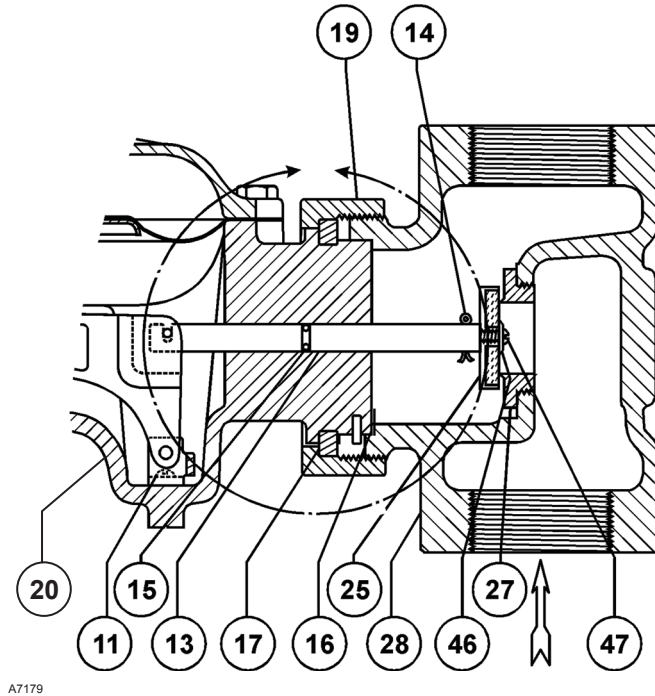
Type Y692VBM O-Ring Stem Seal Detail
